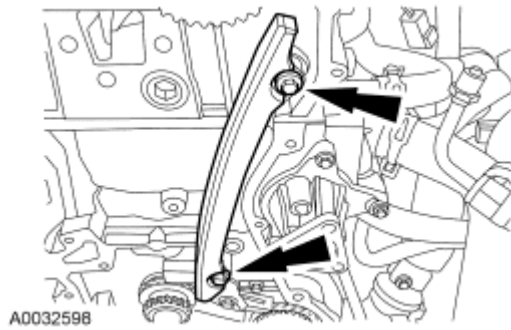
Identifying Bolts And LH Timing Chain Guide
